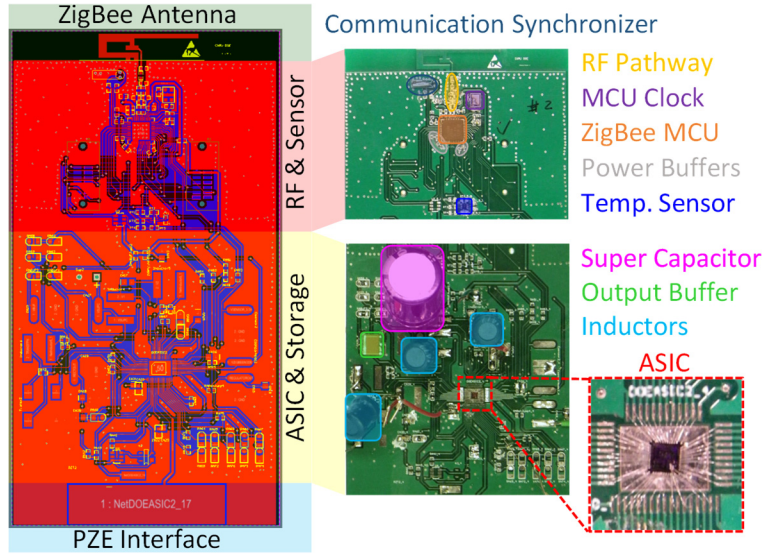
Design and assembled product of the mainboard. Fan-out image: ASIC wire-bonded on the PCB.
